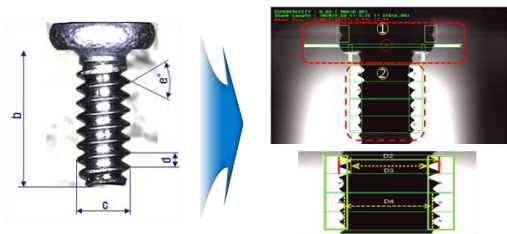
Measurement of typical dimensions of M0.8 xP0.2 micro screw
